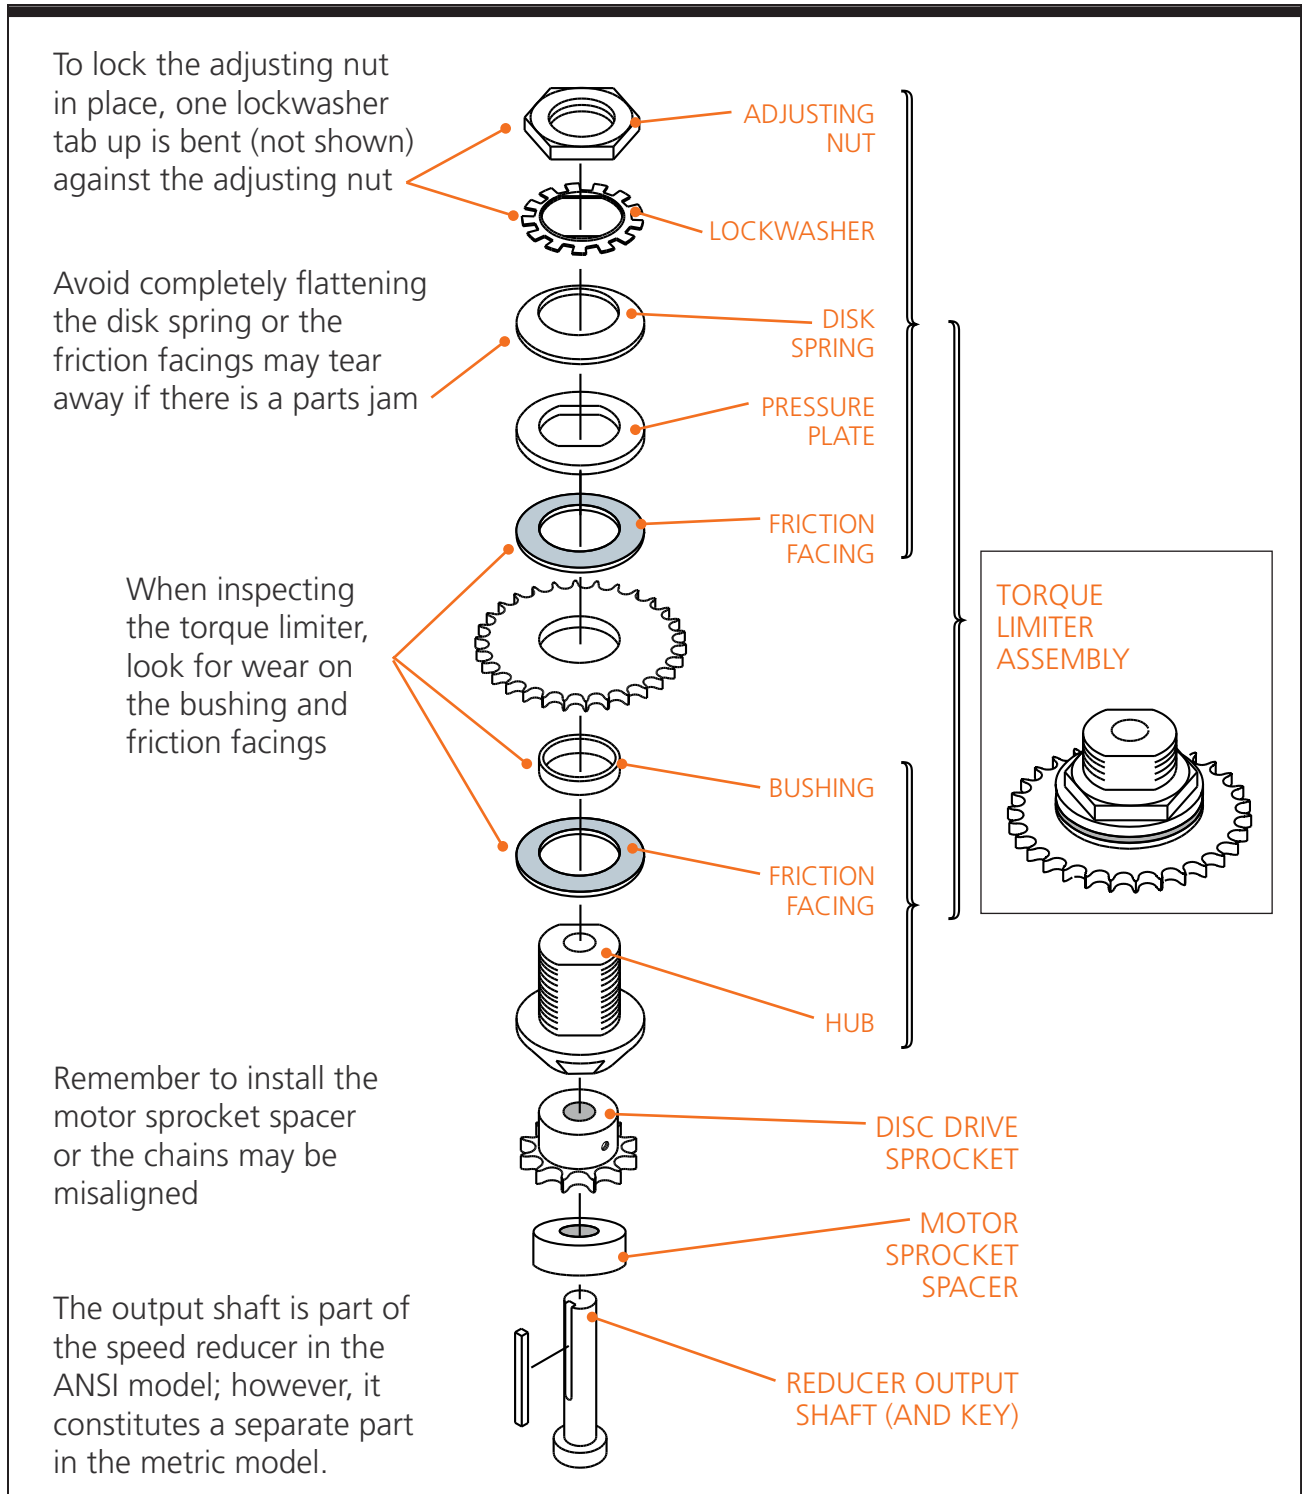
Torque Limiter Assembly (Exploded View and Assembled View)
